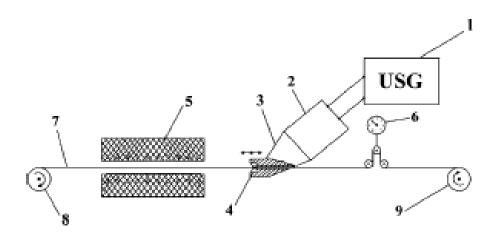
A scheme of apparatus for wire drawing with superimposed ultrasonic vibrations: (1) ultrasonic generator, (2) ultrasonic transducer, (3) ultrasonic horn, (4) die, (5) pusher-type furnace, (6) dynamometer, (7) wire, (8, 9) spools.
